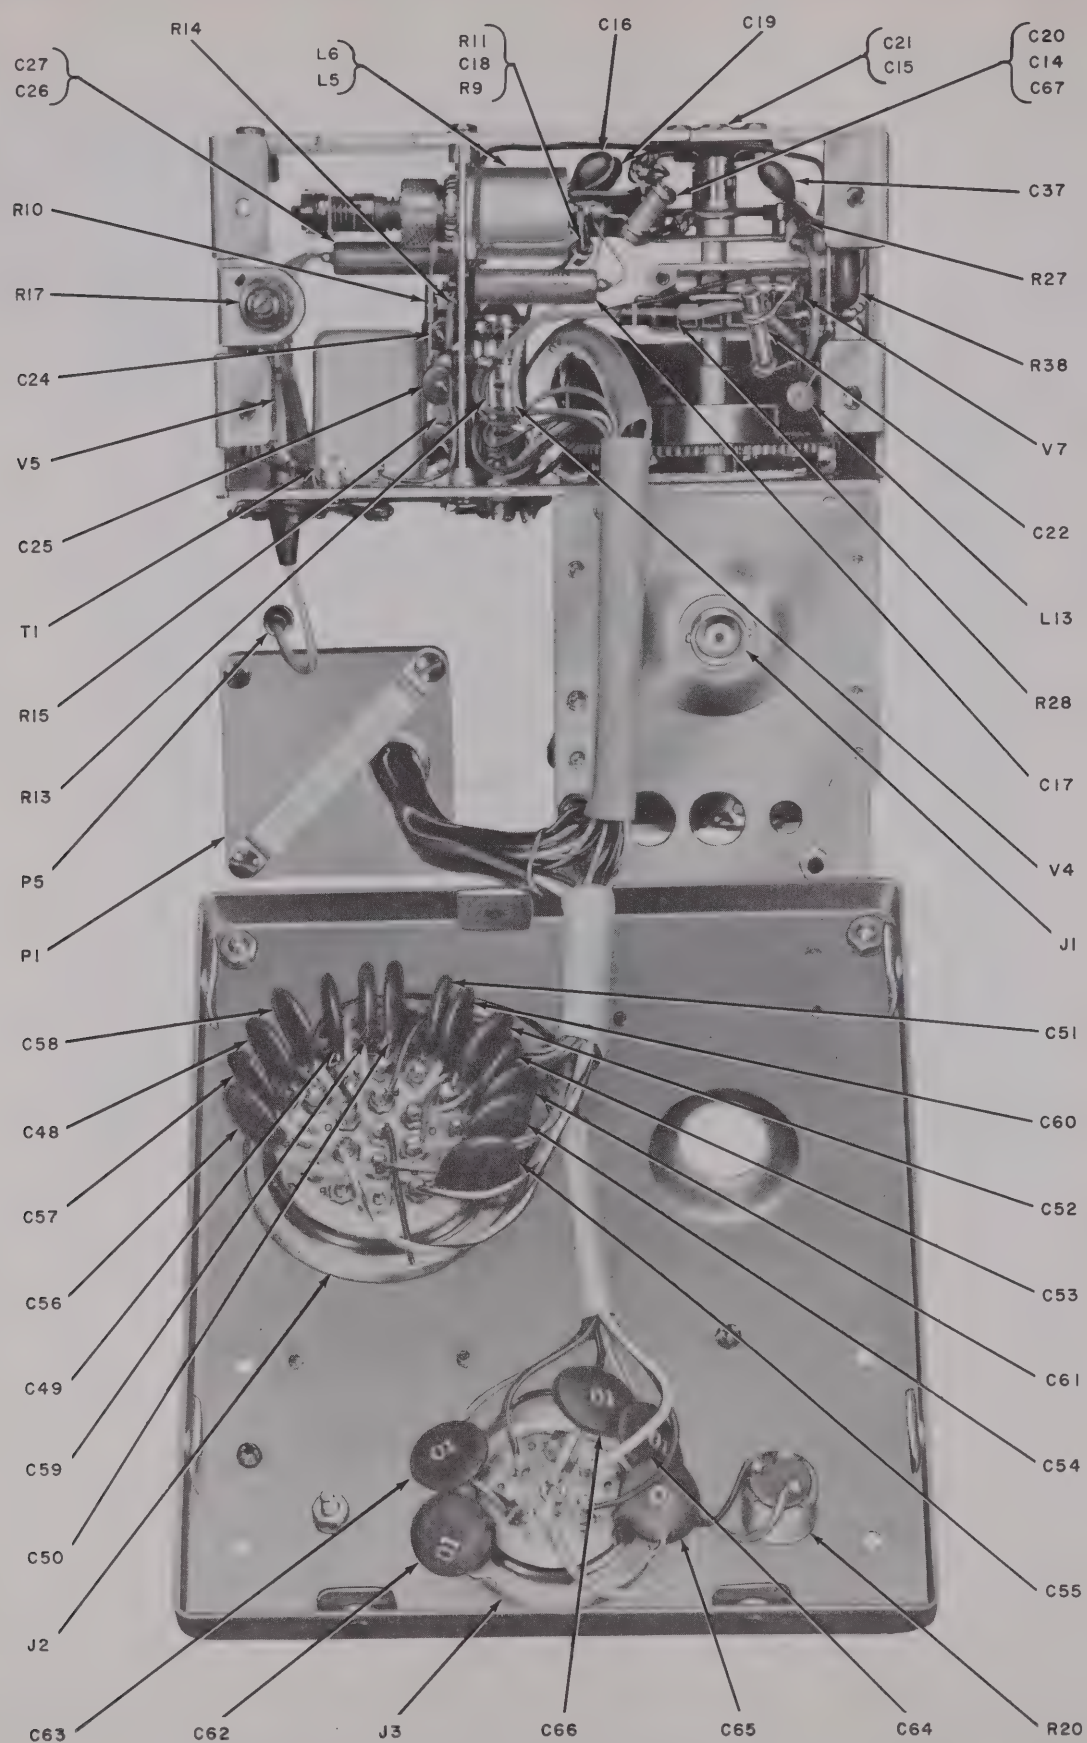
R-34A Receiver, R-f/I-f Assembly, Front View
